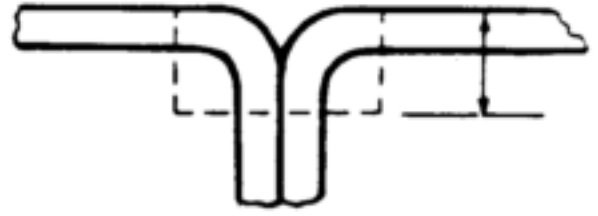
Dimensions of groove welds with specified root penetration.
